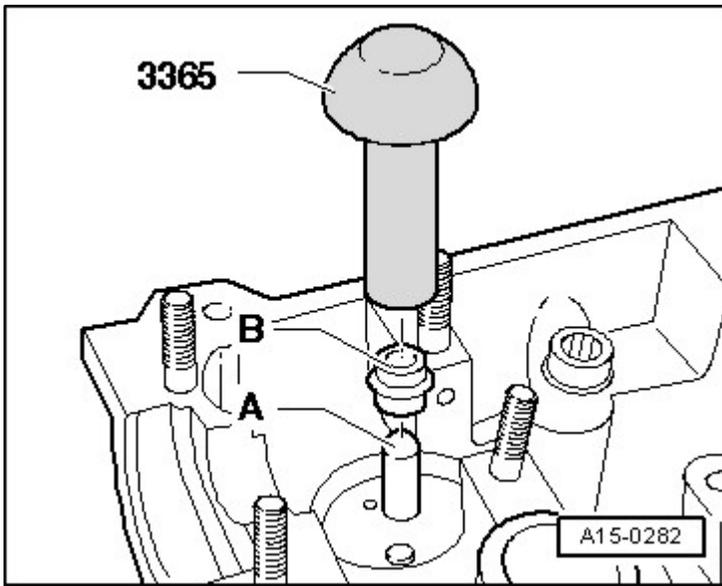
Identifying Plastic Sleeve, New Valve Stem Oil Seals & Valve Stem Seal Driver 3365
